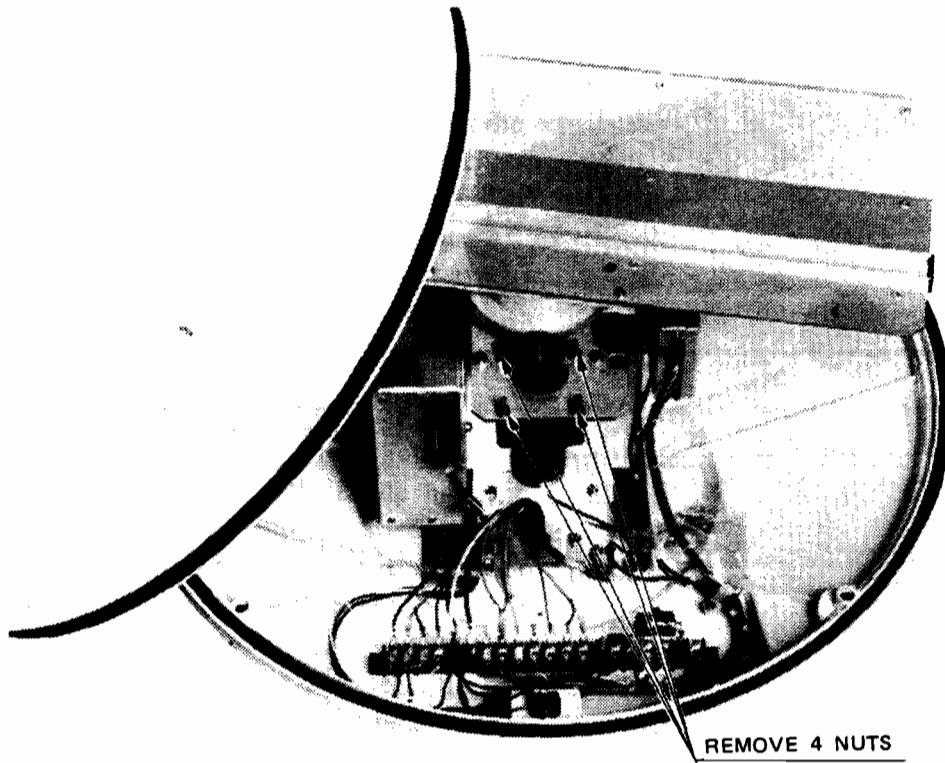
REPLACEMENT OF DRIVE MOTOR
